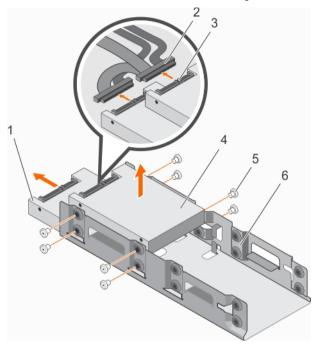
Removing a 2.5 inch cabled hard drive (hard drive 0/E and hard drive 1/F) from the hard drive cage
